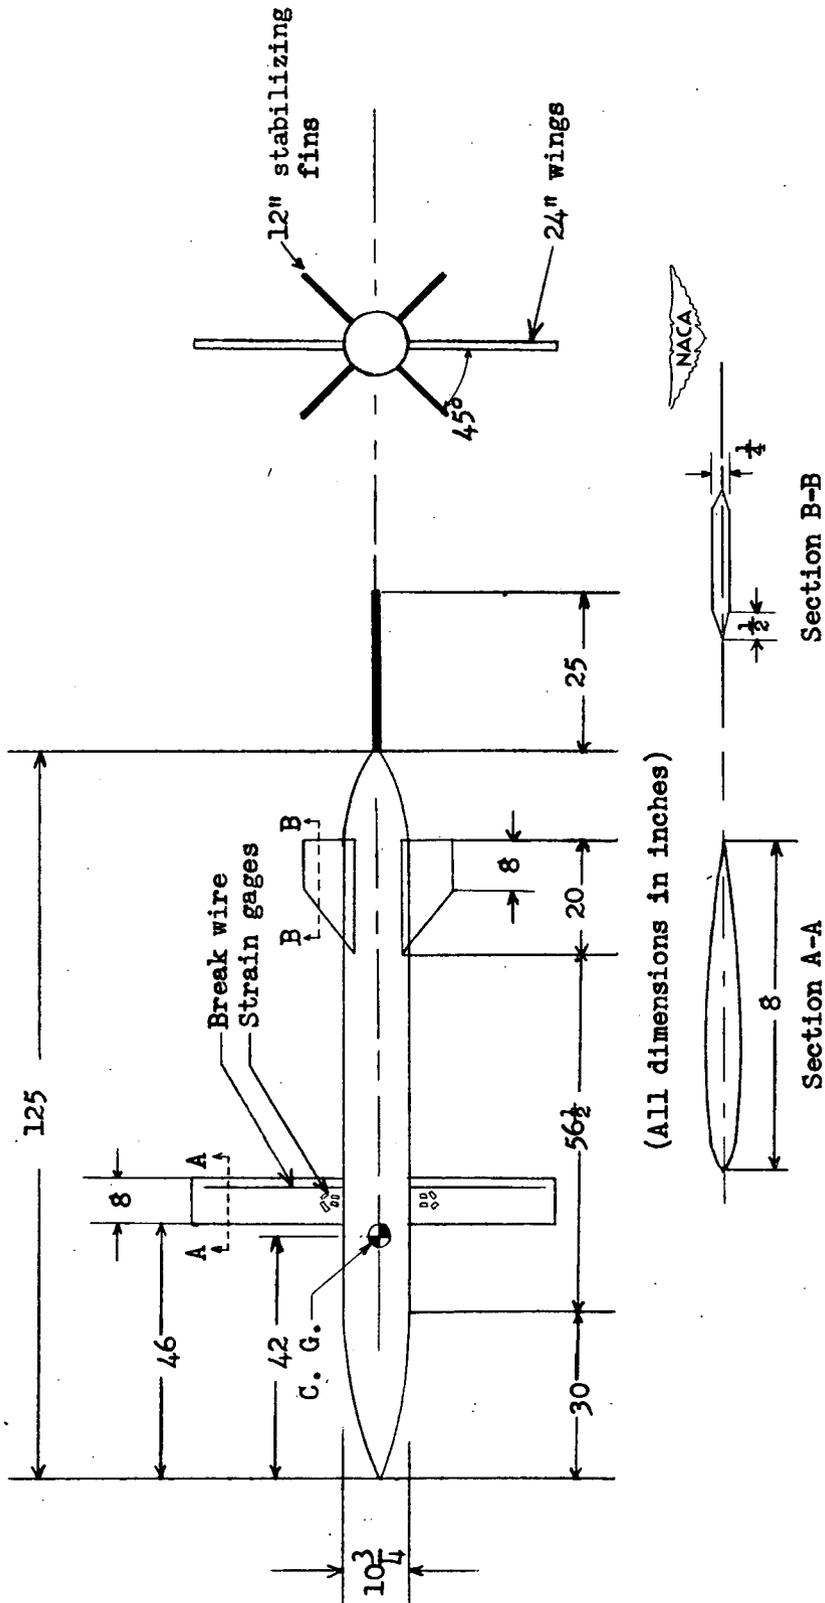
Dimensional drawing of the FB-5 and FB-6.
